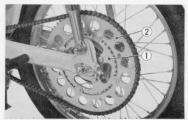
Earlier series rear sprocket (Prior to CT90 F. No. 122550)
